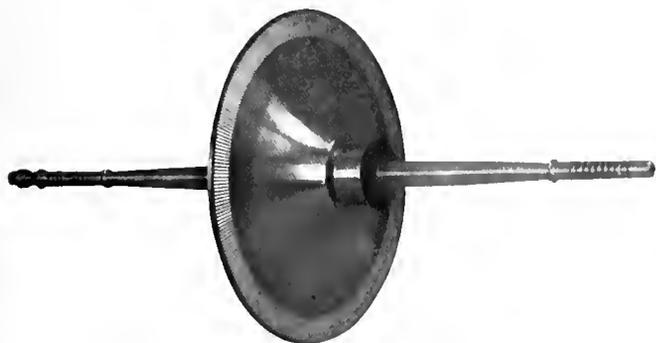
Rotor and Shaft of Standard 100,000 Cycle Alternator
